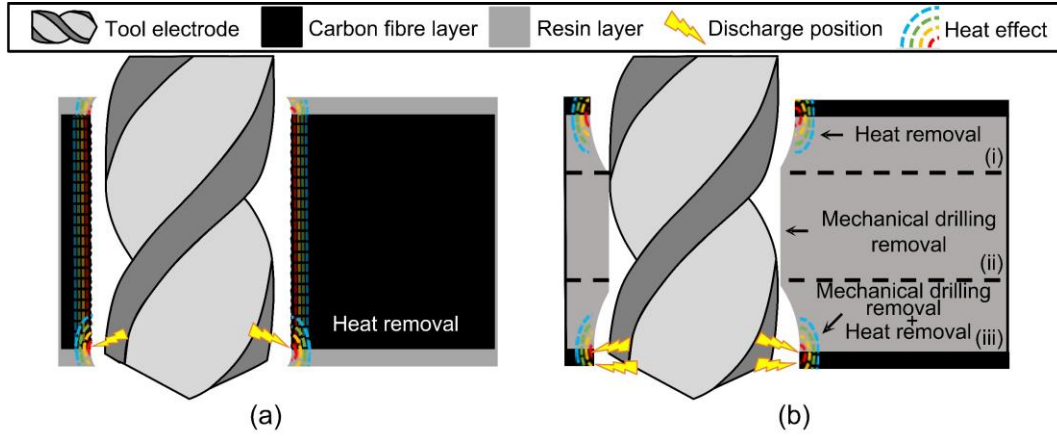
Mechanism of material removal in electrical discharge-mechanical hybrid drilling of CFRP. (a) Removal mechanism of carbon fibre in the CFRP. (b) Removal mechanism of resin in the CFRP.
